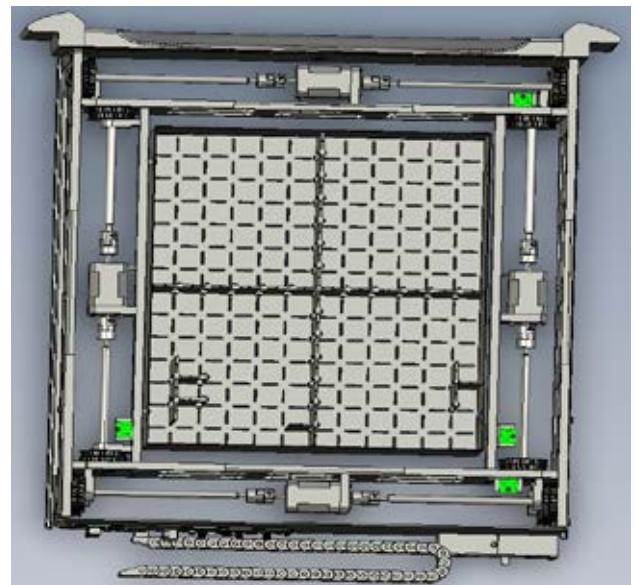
Magnet Reader Cards Position on the Electronic Drawer
